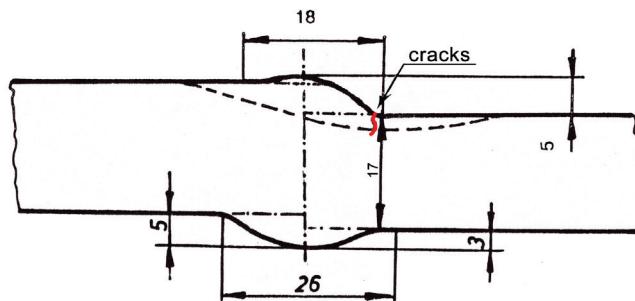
Geometry and dimensions of a welded joint with linear misalignment.
